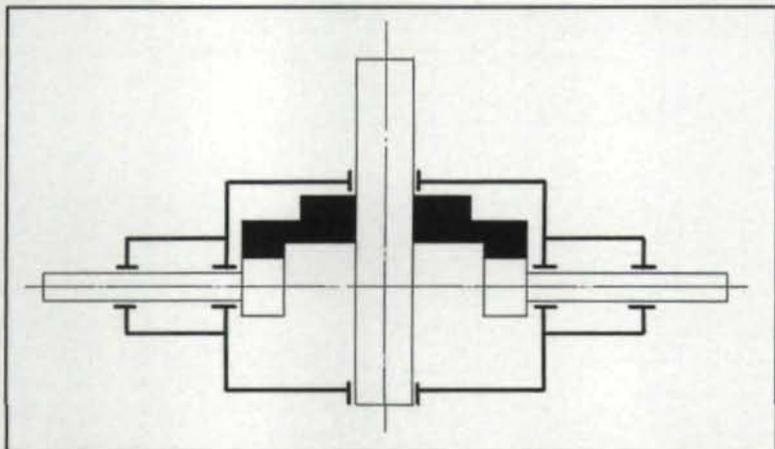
Multi-power design for a pinion as an integrated part of a shaft.
